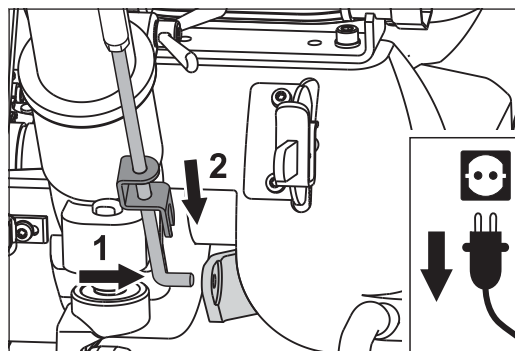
Put the lower rod in the hole of the lifting fixture (1) and fix them with the closure (2).
